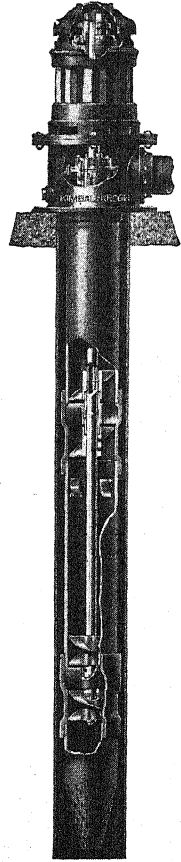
Cutaway section of a direct flow deep-well pump, showing shaft and impellers. (Courtesy: Kimball-Krough Pump Company.)
